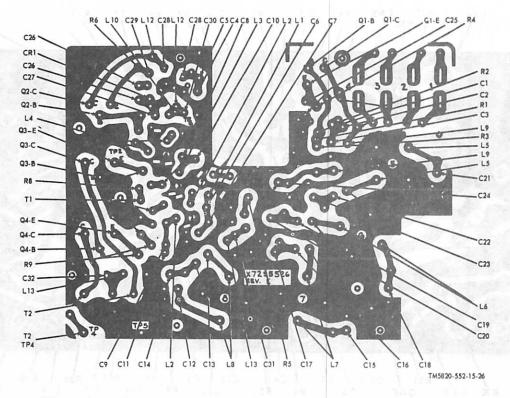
Component terminal locations, transmitter assembly A4A9A2.
